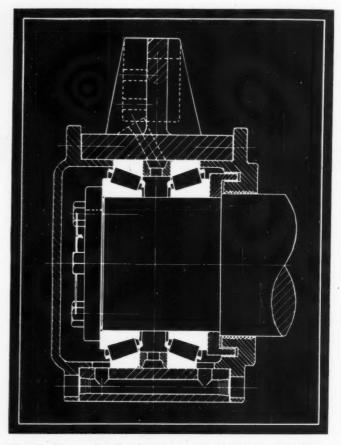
Tapered roller bearing mounting incorporating a circulating oil system. Cup spacer separates bearings
